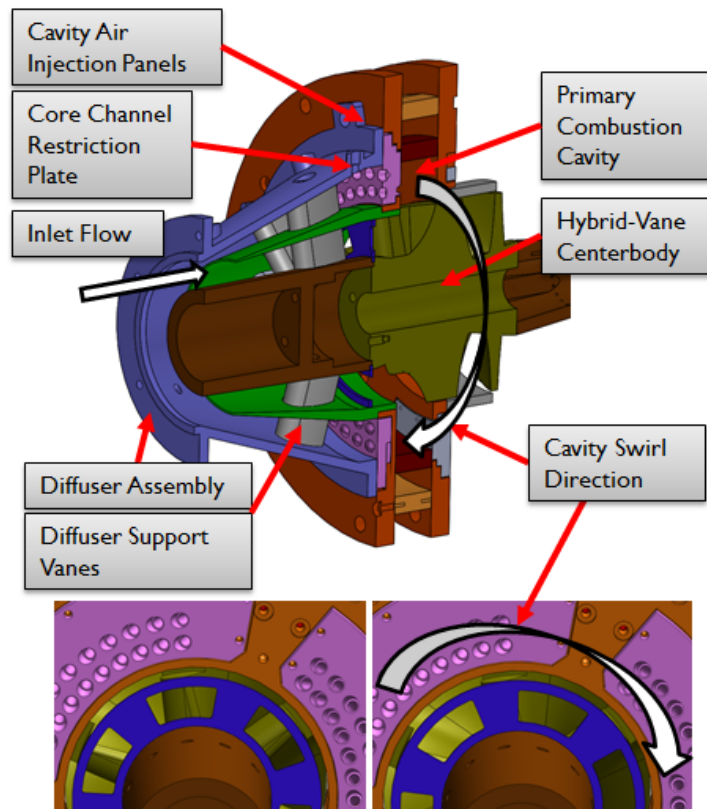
Exploded views of UCC combustor assembly (top) and diffuser assembly (bottom)
